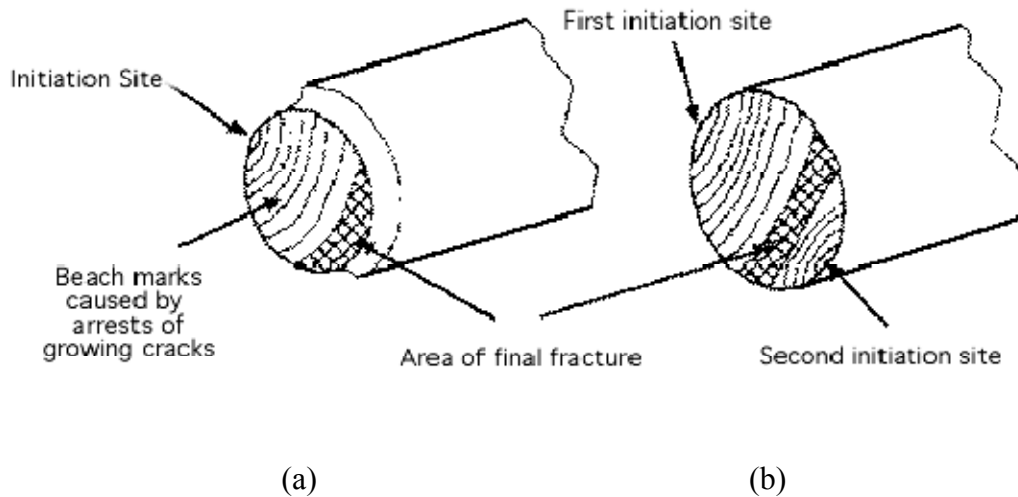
Fatigue failure of circular shaft under bending fatigue stress [8]
